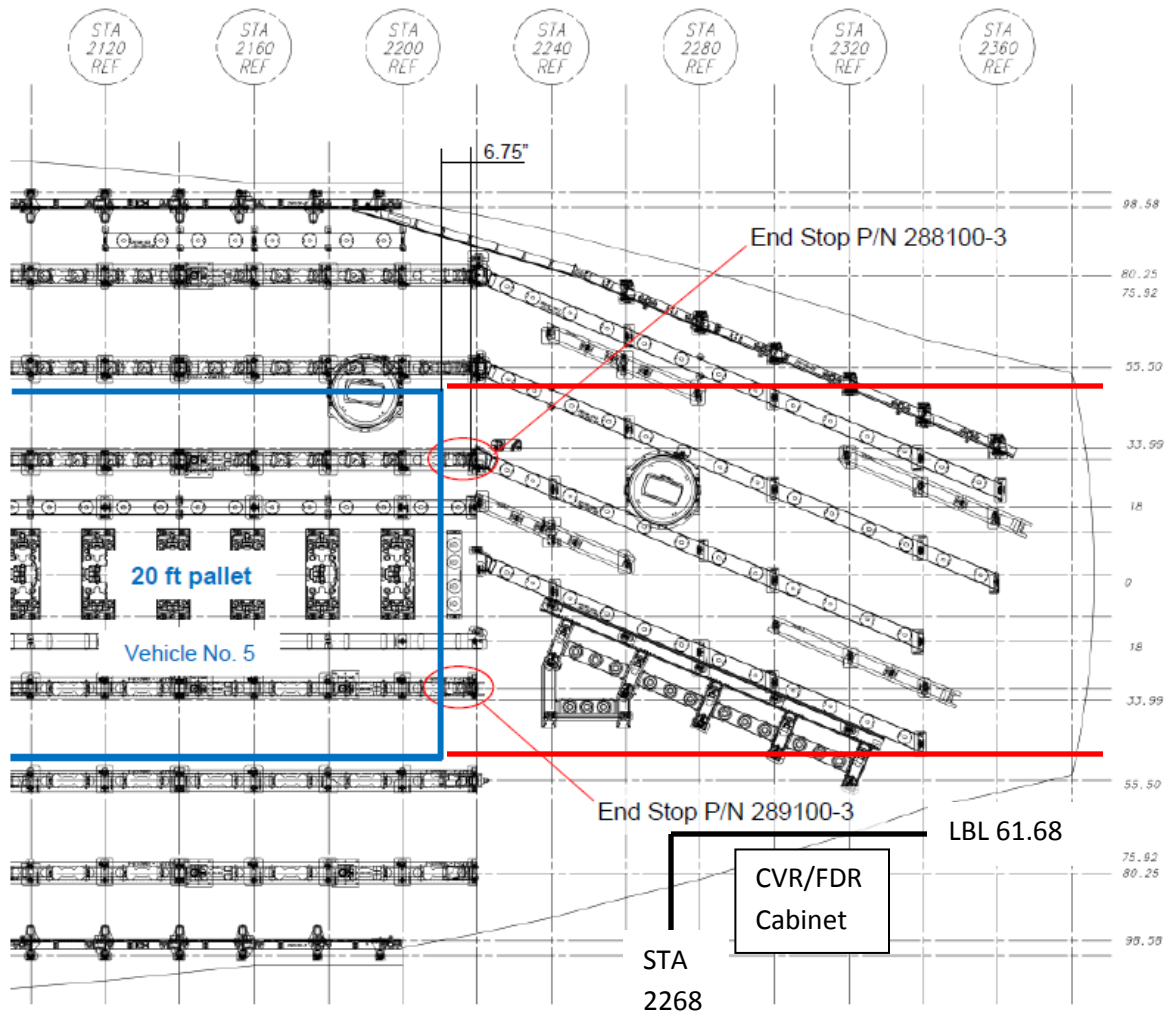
20 Foot Pallet and Main Deck Plan View
